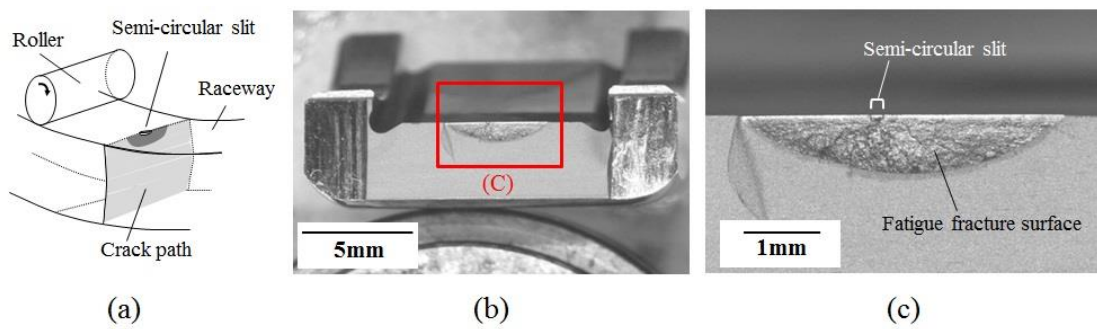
Fractured outer ring having Type A defect: (a) schematics of fracture surface, (b) picture of the fracture surface; (c) magnified picture of the fracture surface.
